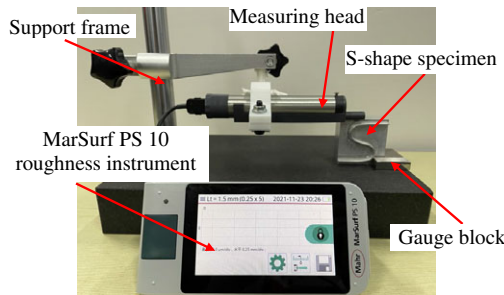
S-shape workpiece test platform of geometric error of surface contour.
